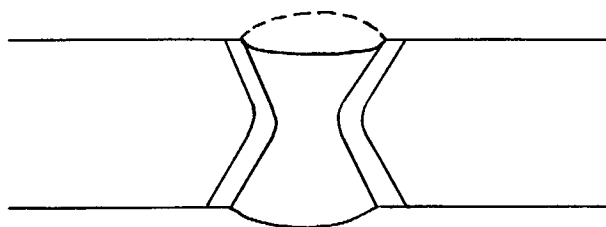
(a) - Schematic representation of the corrosion of weld metal
